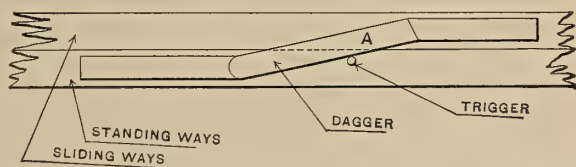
RELEASING GEAR FOR VESSEL TO BE LAUNCHED.
